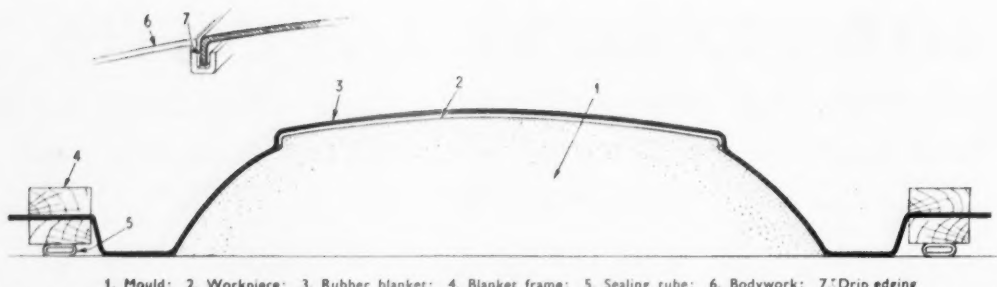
Semi-diagrammatic view through a male-type vacuum-mould showing one method of moulding an engine access panel. Detail shows the method of moulding drip-edging
